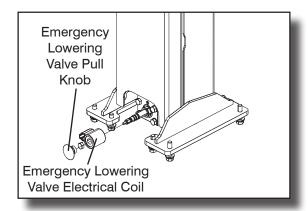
Emergency Lowering Pull Knob and Electrical Coil Removal
